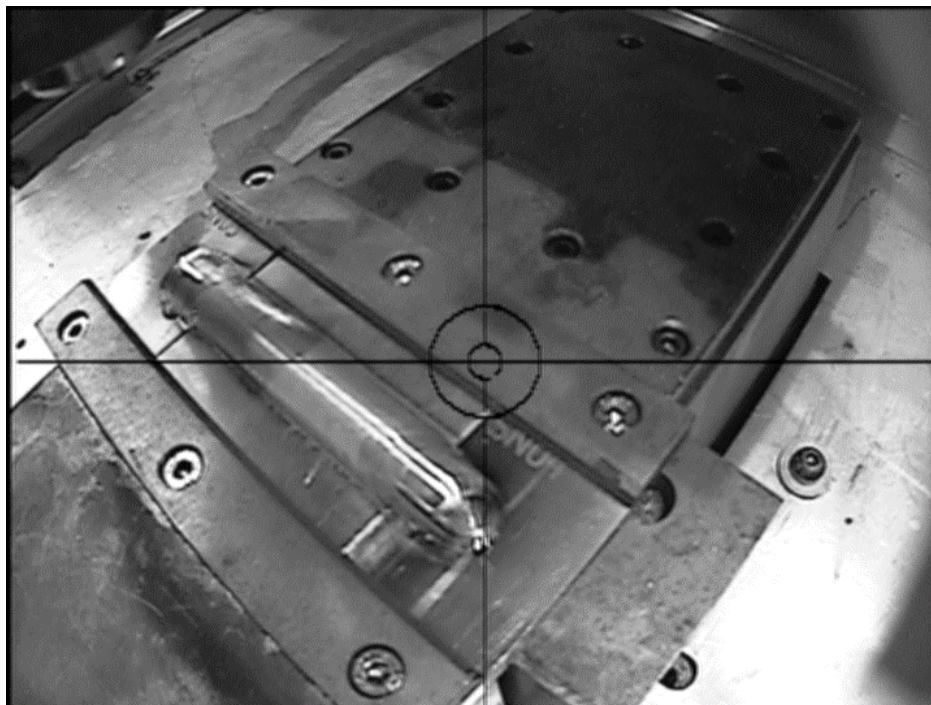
Completed Friction Stir Weld on Irradiated Coupon 304B-1 (the Bright Contrast in the Weld is Caused by Light Reflecting off the Surface)
